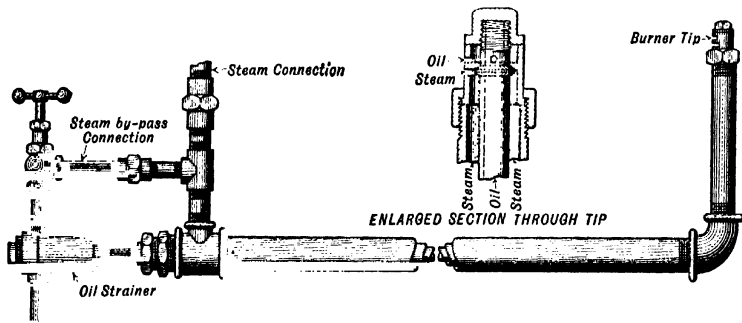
Peabody Steam Atomizing Oil Burner.
